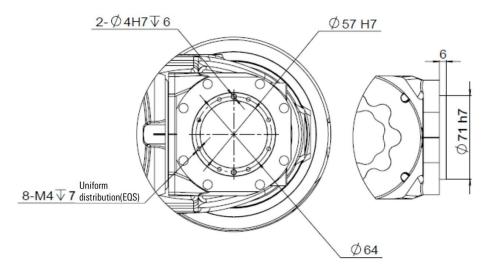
show output flange connection size of AIR10-1700A-HW.
